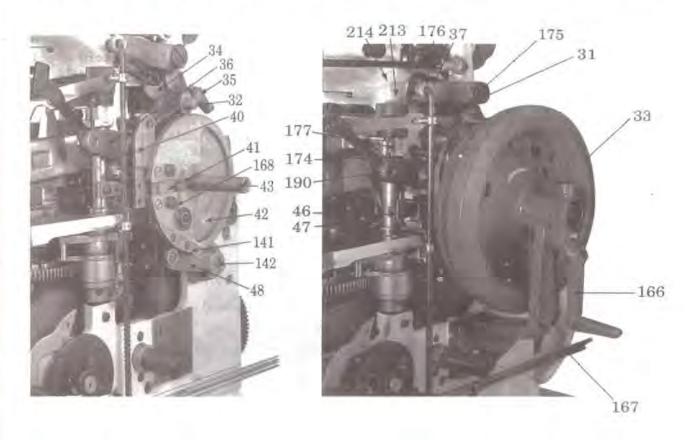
View of Buttonhole Cutter Pulley Showing Buttonhole Cutter Engaging Stud and Latch
